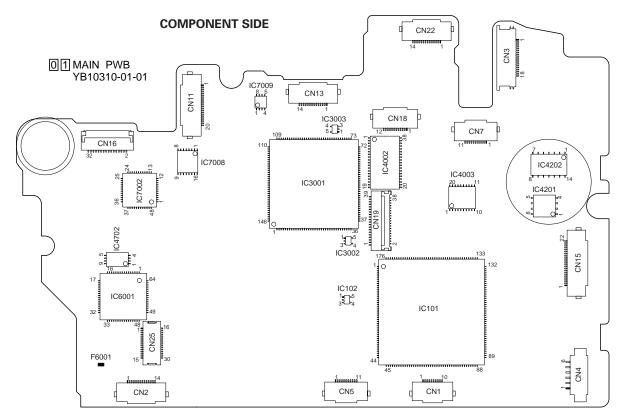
FUSE location for MAIN board assembly (COMPONENT SIDE)
